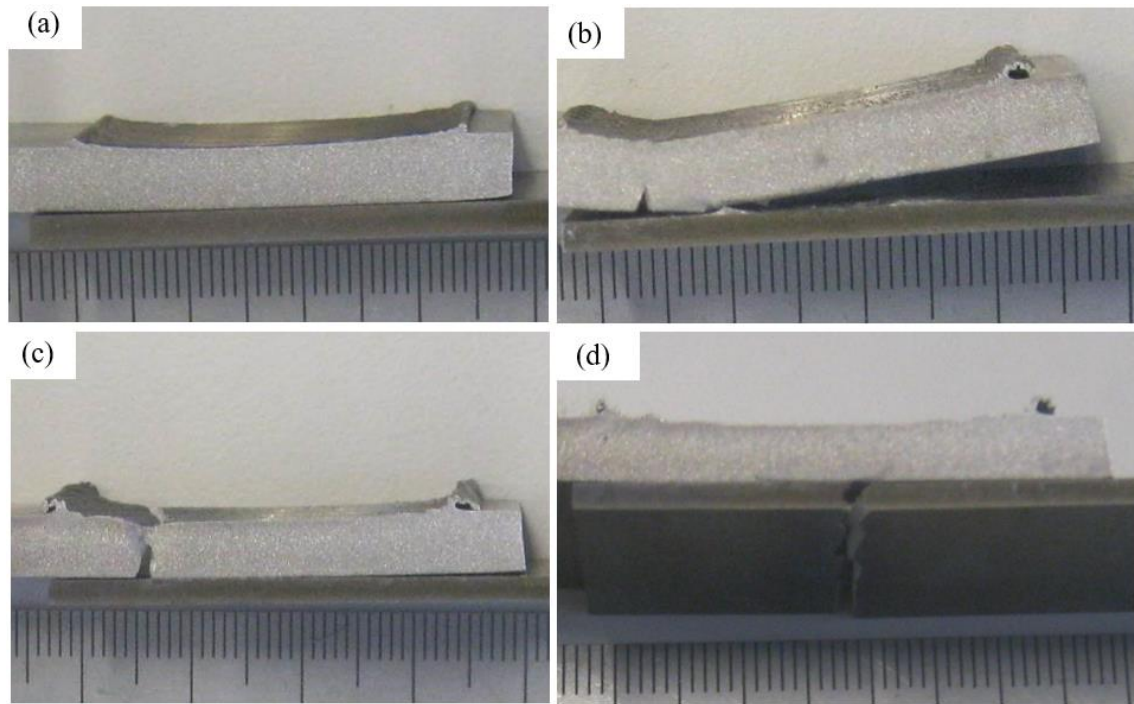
Actual photograph images of some selected FSL weld tested samples showing various fractures paths: (a) fracture path 1-fracture at the AA2024/Ti6Al4V interface, (b) fracture path 1 with crack initiated at AA2024 loading end, (c) fracture path 2- fracture in AA2024 at the loading side, (d) fracture path 3-fracture on Ti6Al4V side with fracture in the centre.
